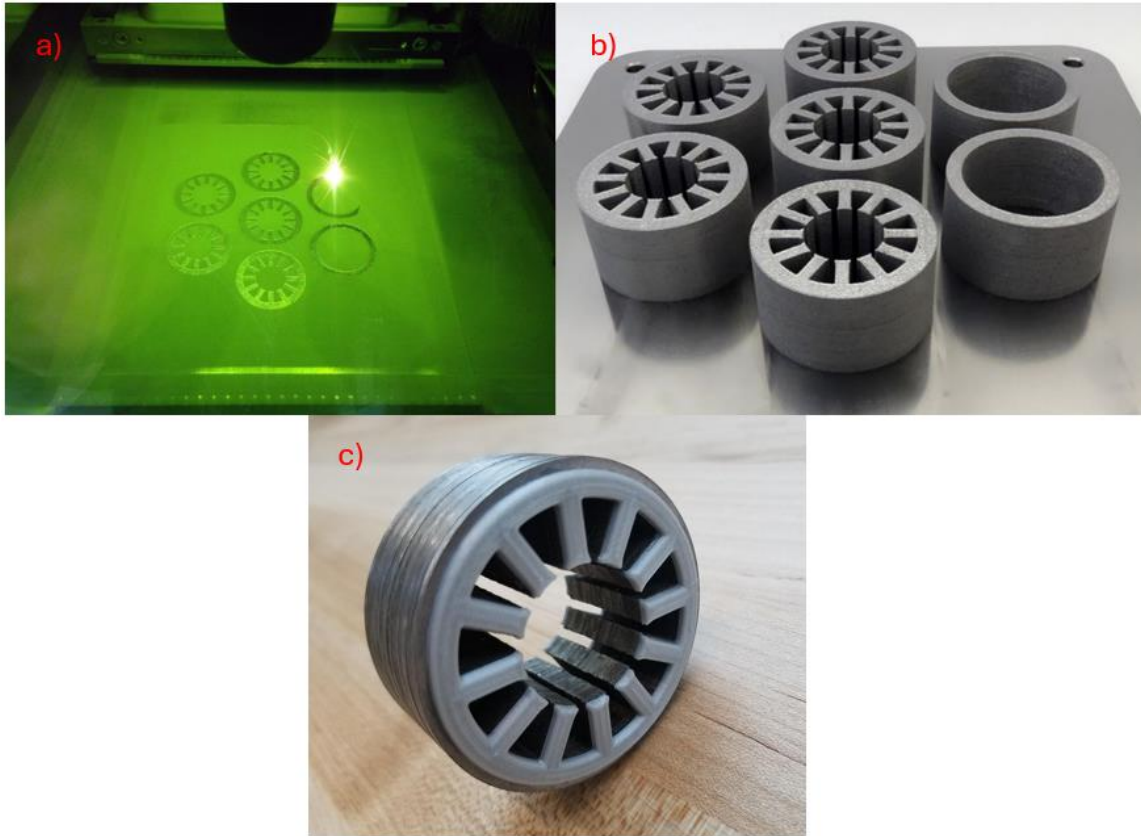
(a) Selective Laser Sintering (SLS) of Fe₃Si rotor part; (b) Completed print; (c) Stacked slices of rotor parts after electrical discharge machining (EDM) shows the process flow used to manufacture the insert for overmolding. [73]
